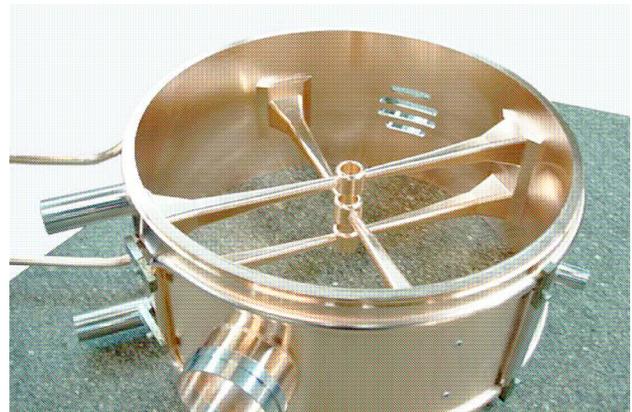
One normal-conducting resonator after brazing of the spokes and ready for welding of the flanges.
